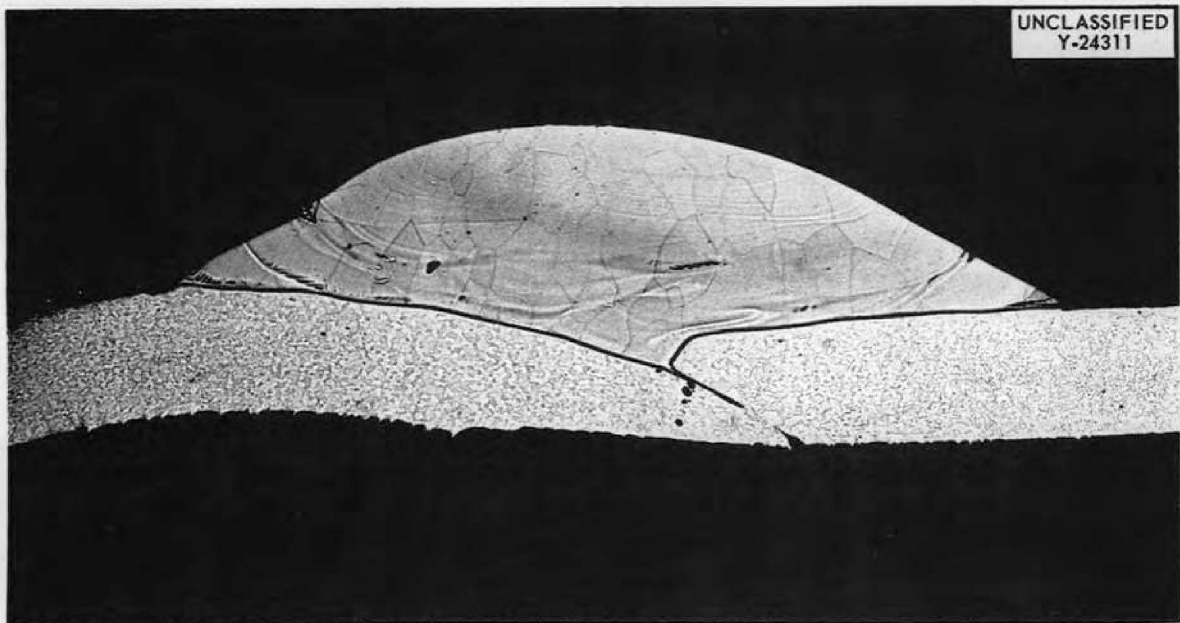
Cross Section of Weld Shown in Fig. 3.3.13. 22X.
